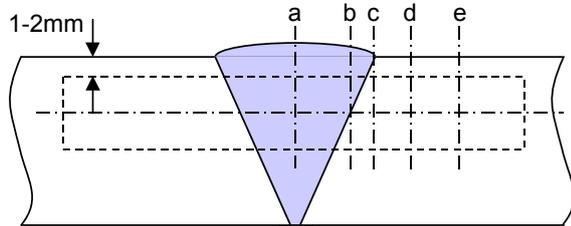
Position of Notch for Impact Test Specimen for rolled steels for hull and quenched and tempered high tensile rolled steel for structure (Where welding heat input is not greater than 50kJ/cm, Unit: mm)
